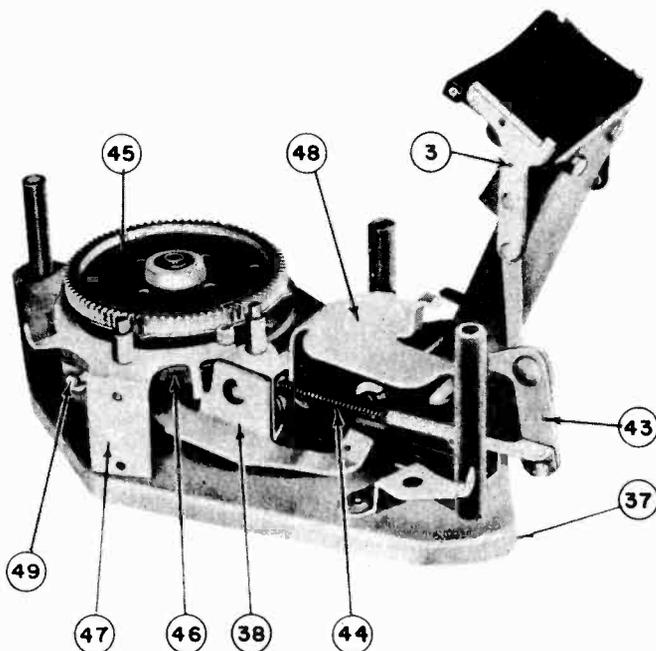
PARTS LOCATION -- SUB PLATE ASSEMBLY
